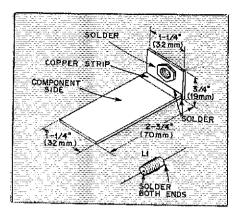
The dimensions and construction of the pc board and BNC-connector upright. At the right is L1, an eight-turn coil of no. 28 wire wound on the body of a 1000-ohm (or higher), 1/2-watt resistor.
